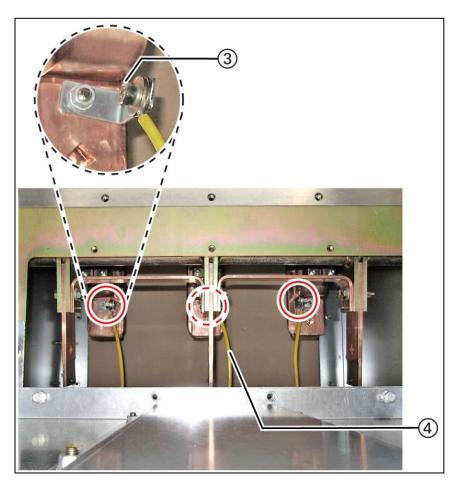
3 bolted joints at the cable connections (central joint covered)
